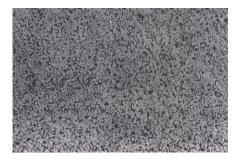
Inside tube erosion-corrosion For tube in desuperheating zone
